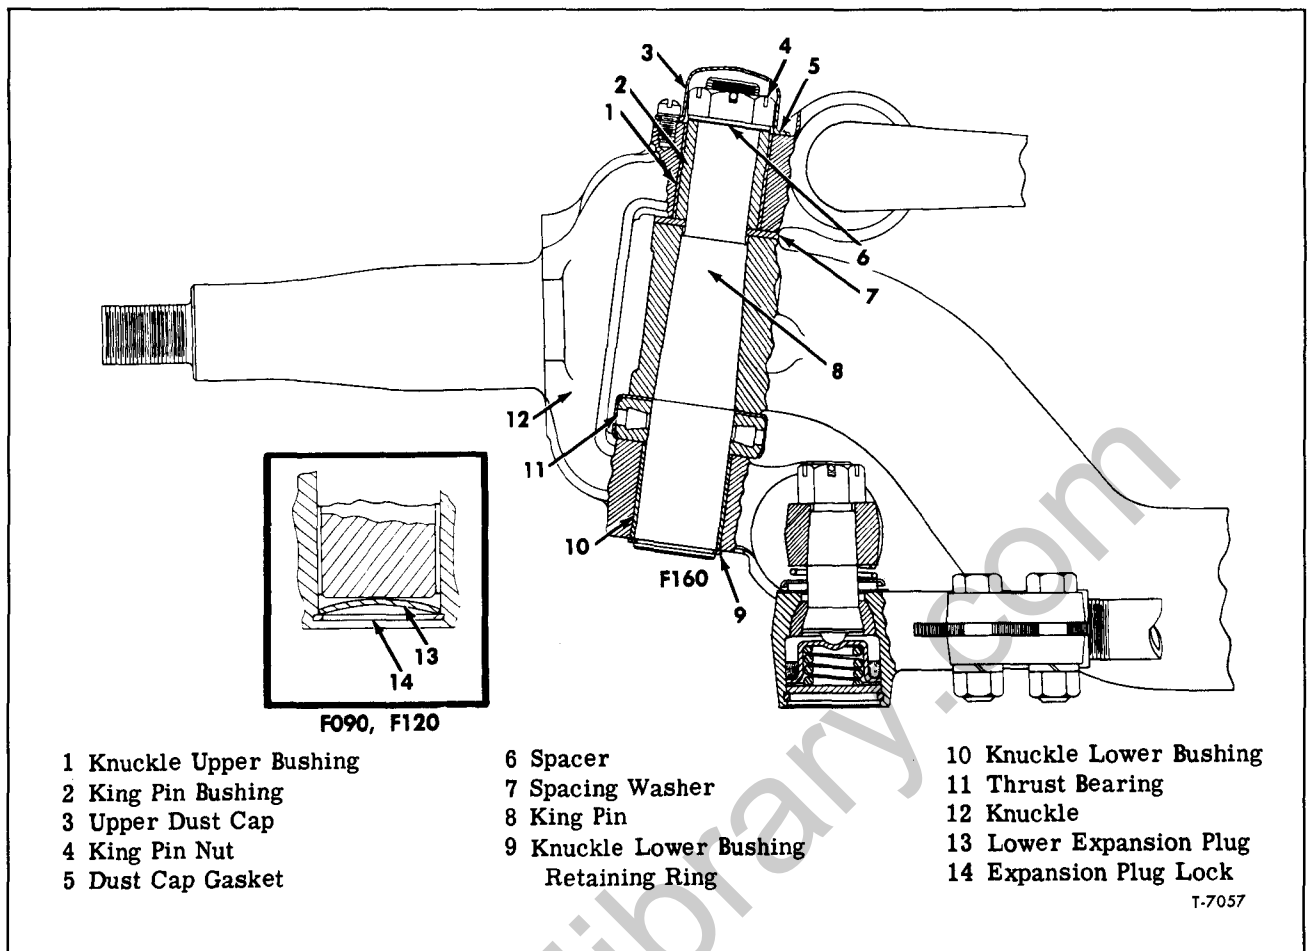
Steering Knuckle Construction (F090, F120, and F160 Axle)
